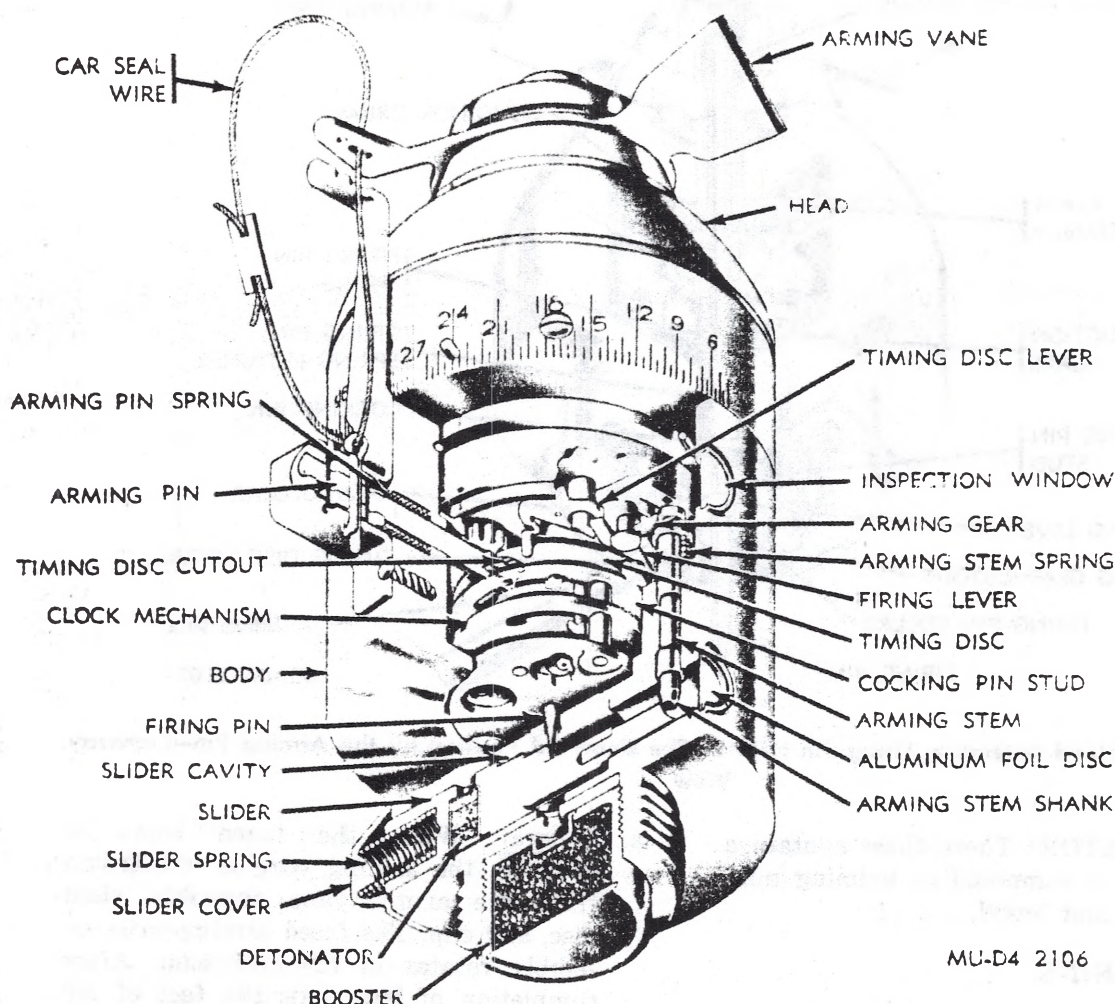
Fuze M198 in The Unarmed Condition—Cutaway View
